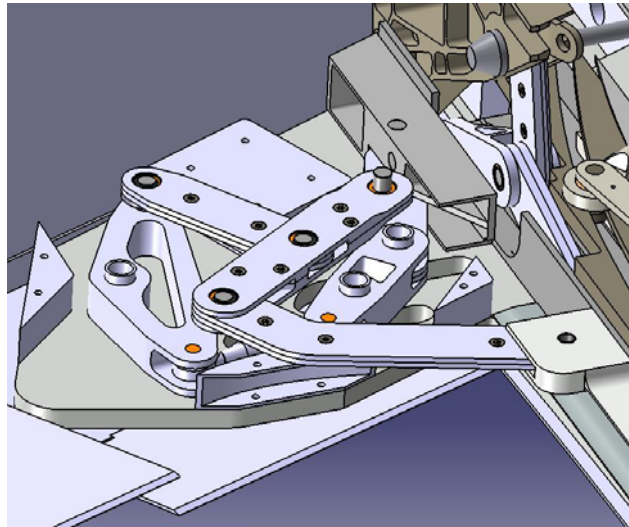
Full outboard TLM (top counterpart and cover removed)
